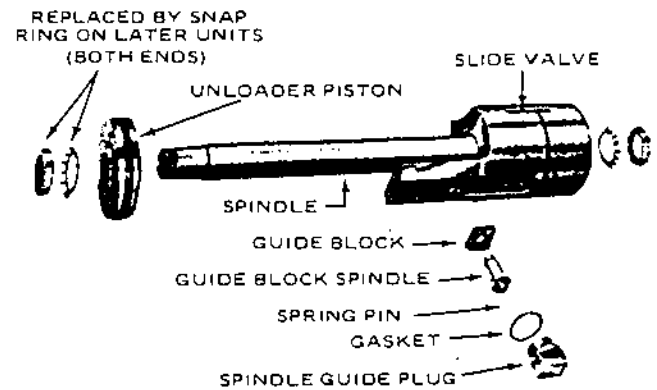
SLIDE VALVE PARTS & ARRANGEMENT
